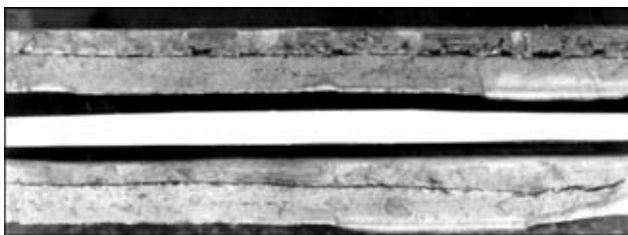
Extended filamentary inclusions of oxide films in fractures of the TIG welds on plates of alloy 1460
